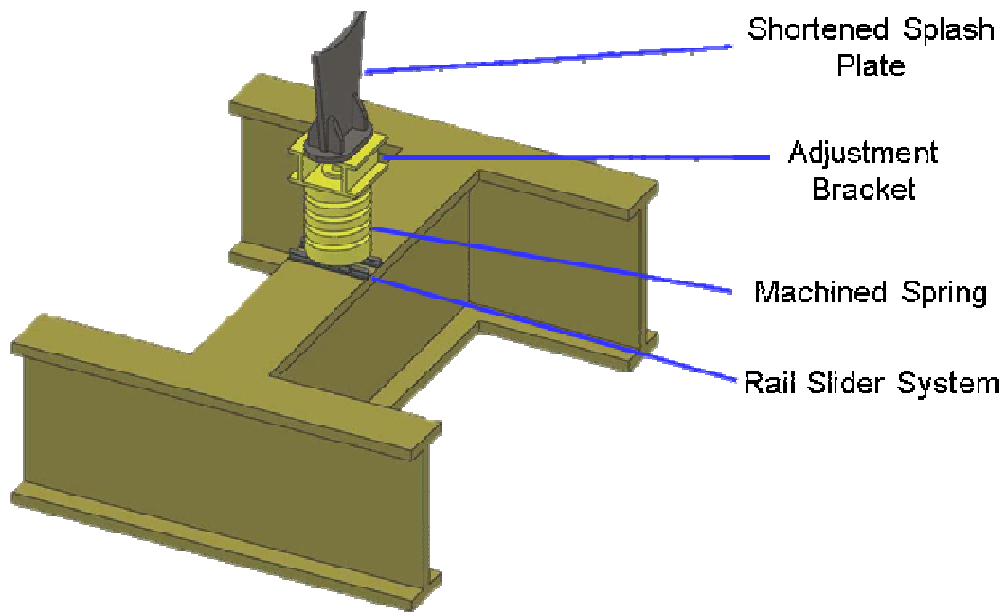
Elastic concept design layout showing the machine spring and slider system.
